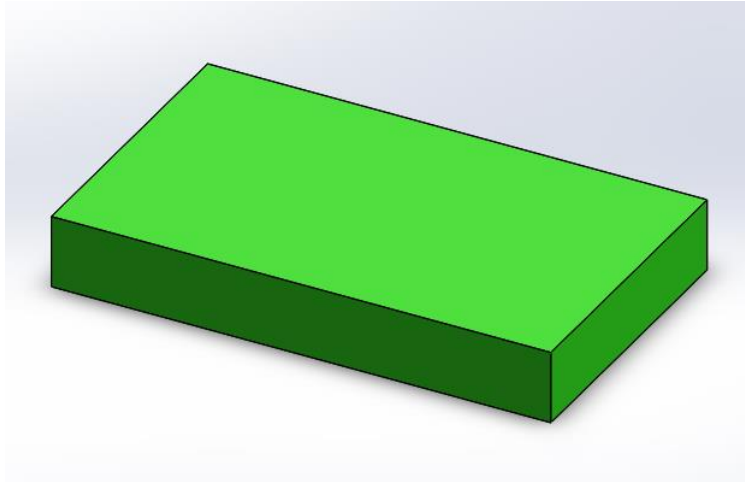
CAD model overview of the wireless charging transmitter PCB.
